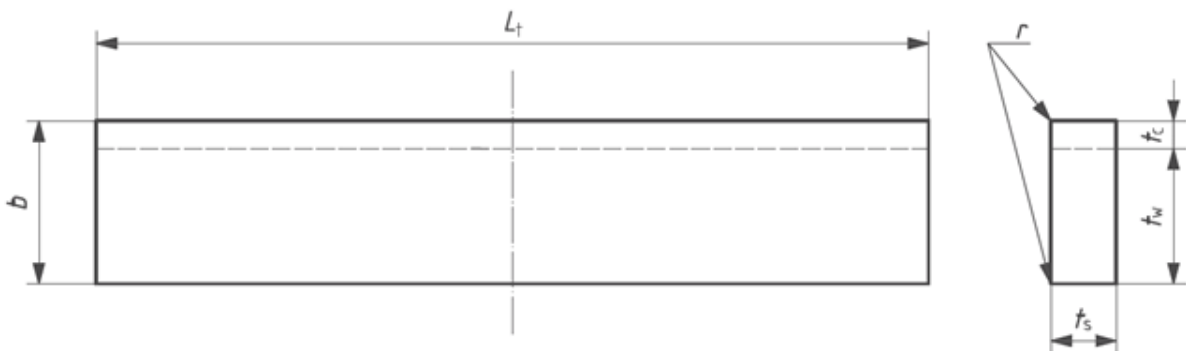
Side bend test specimen for cladding without a butt weld (SBC).
